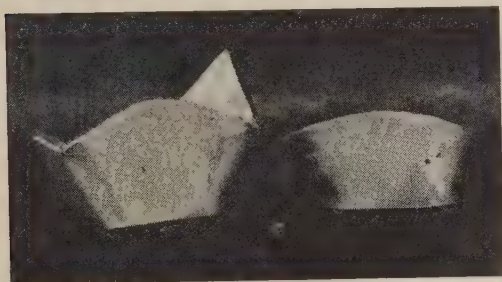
BEND SPECIMENS OF WELDED SAMPLES THAT WERE LABORATORY-HEATED AFTER REMOVAL FROM SERVICE
